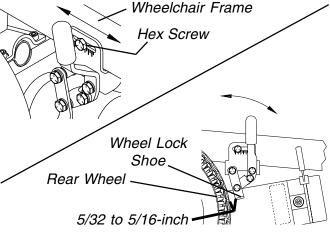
INSTALLING/ADJUSTING WHEEL LOCKS
